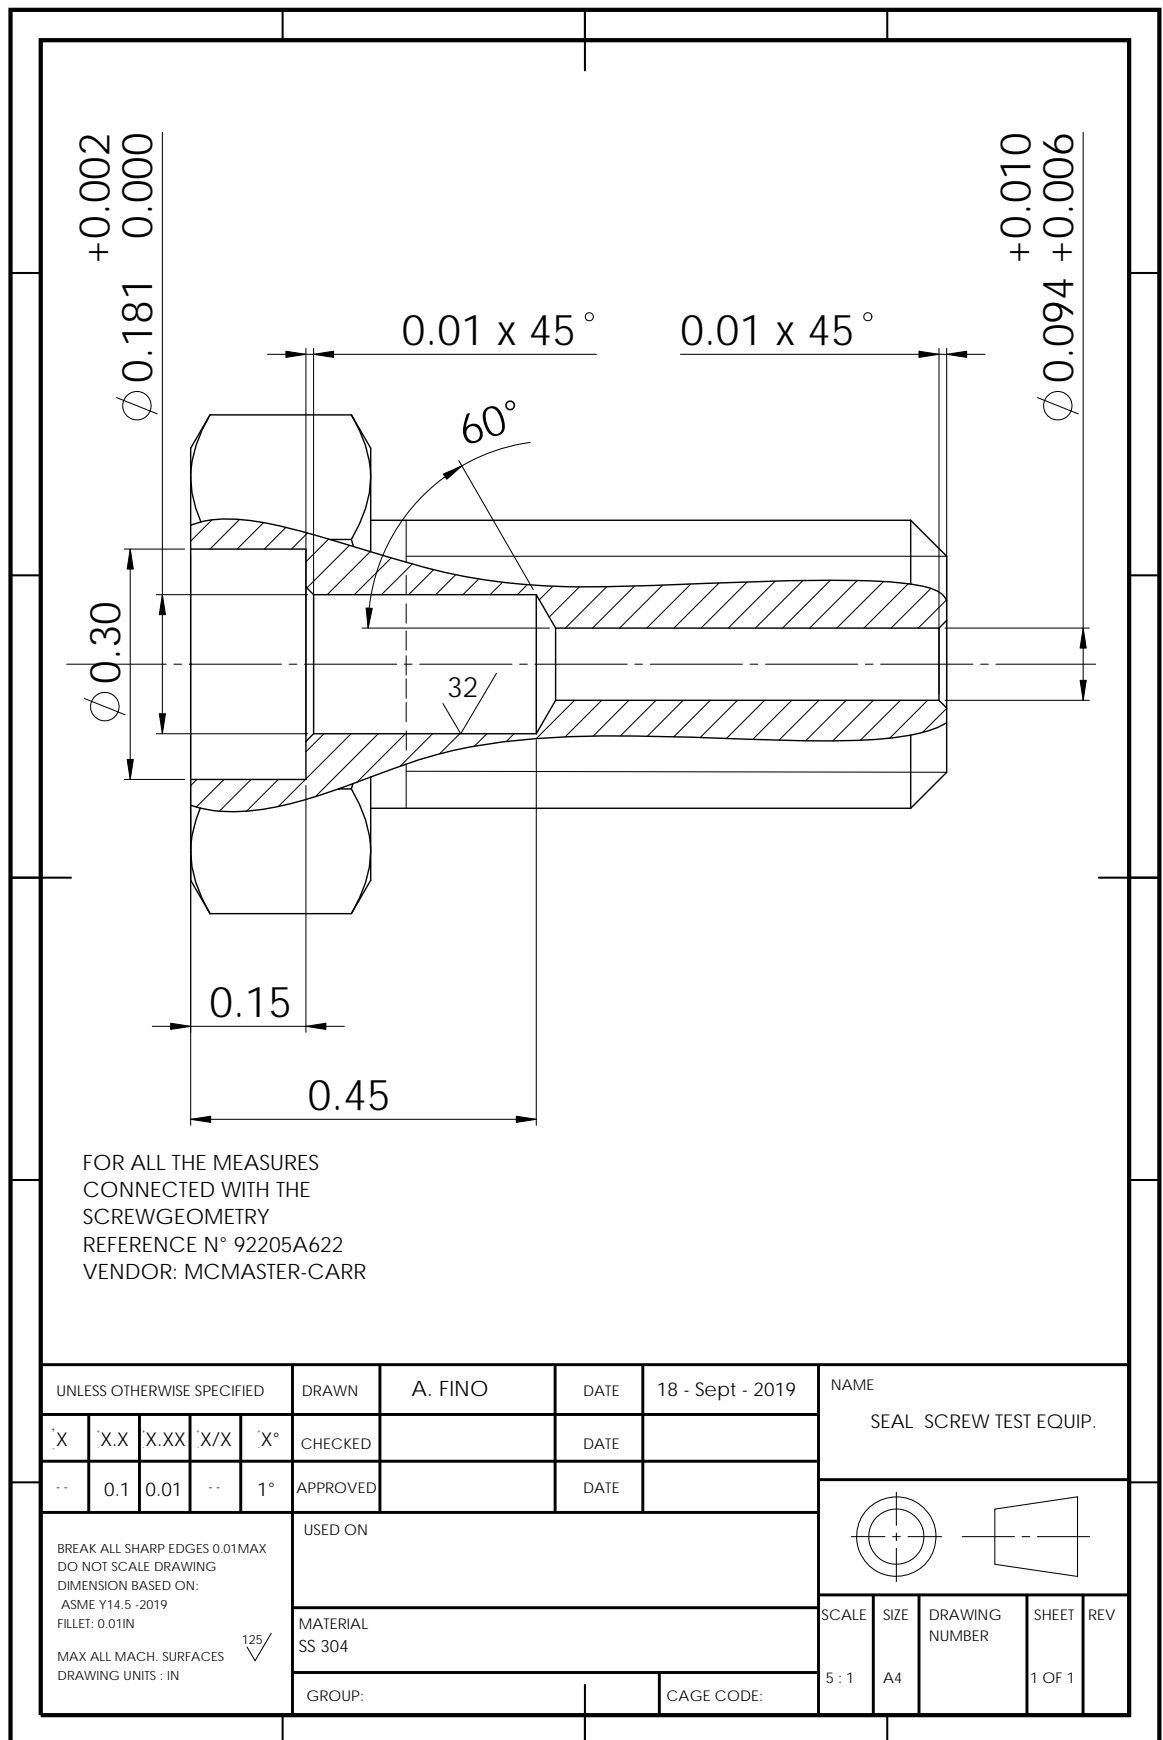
Sealing Screw Modified, Mechanical Drawing.
